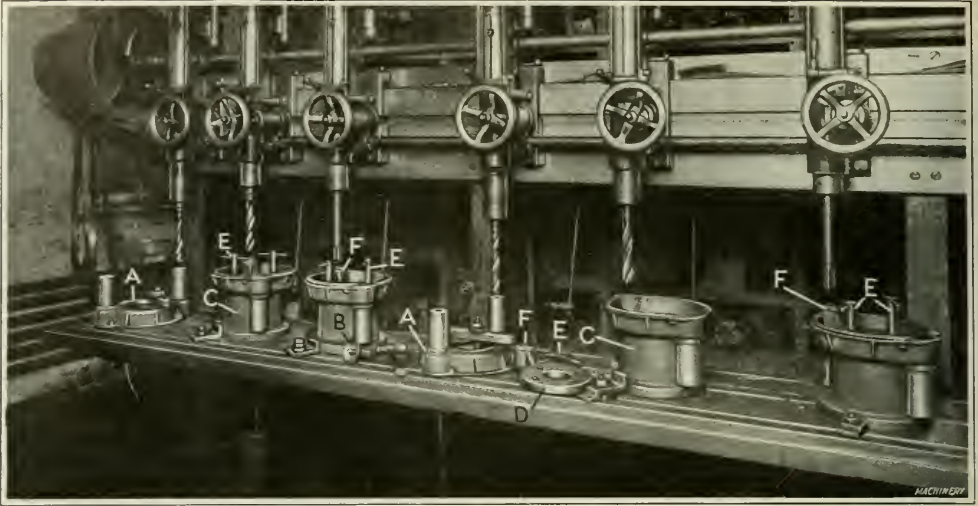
Multiple-spindle Drilling Machine arranged for drilling Hole in the Pinion-shaft Case
